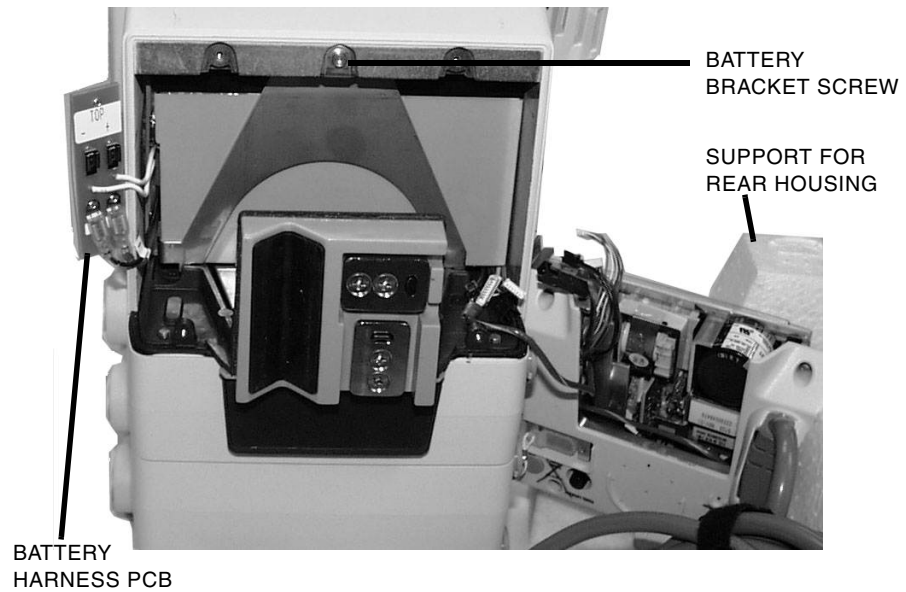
Rear View of Pump with Rear Housing and Rear Battery Removed
